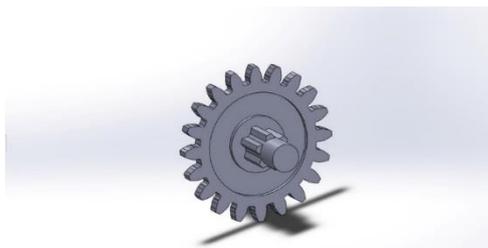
Spur gear model with the shaft in SOLIDWORKS 3D environment
